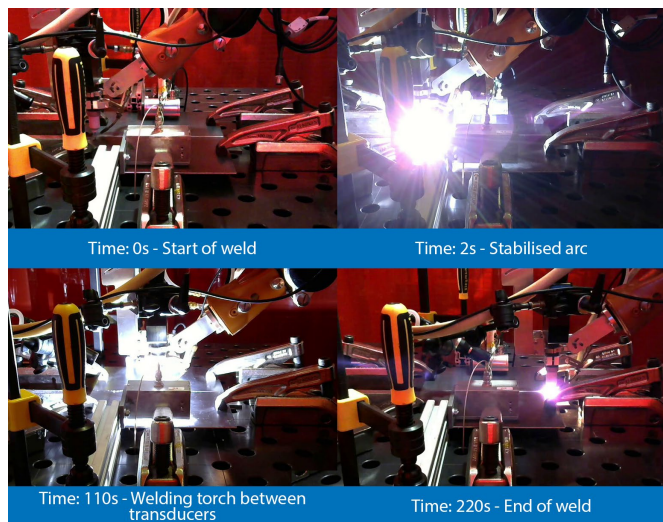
Frames from video of welding trials: the welder is triggered at 0s; 110s later the welding torch passes through the middle of the inspection region; the weld is complete in 220s.
